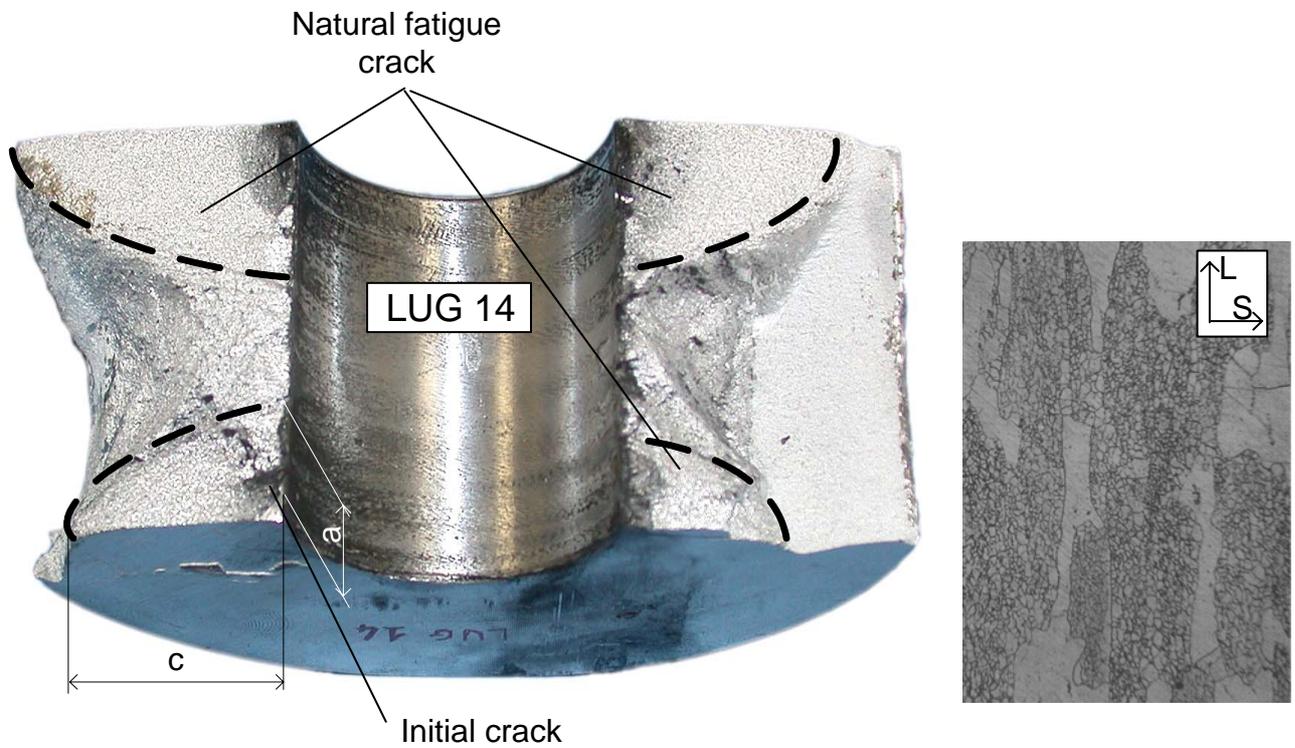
Typical fracture surface in a lug/fork specimen and micrograph of the internal structure of the material.
